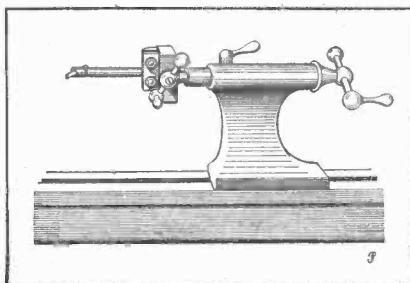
Assembled on the tail stock of your lathe—ready for work.
